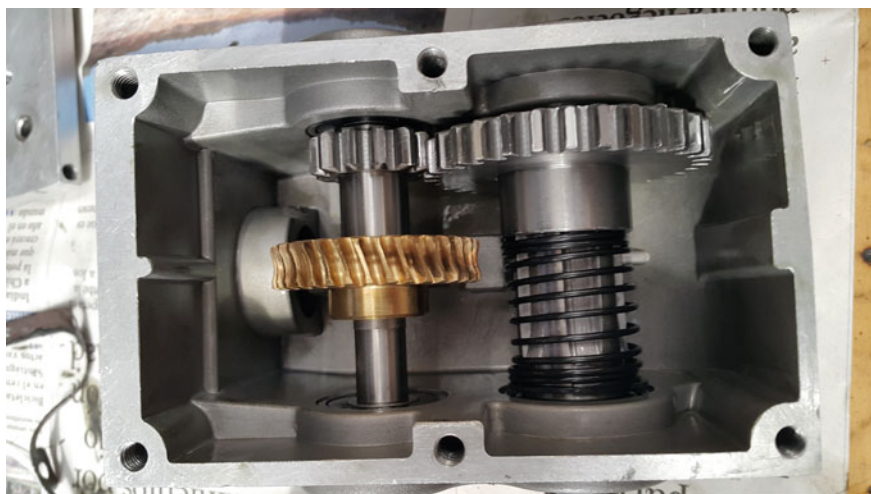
Gearbox of the R1 robot composed of a worm gear and spur gears
